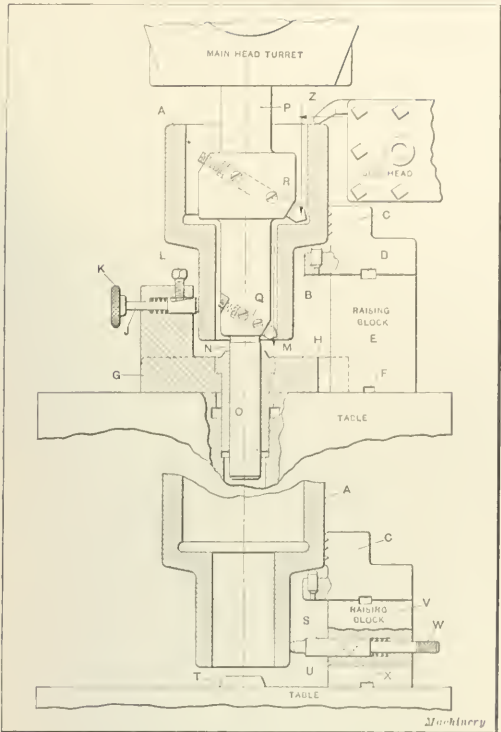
Original and Improved Methods of holding Large Hub Casting by Three-point Support
